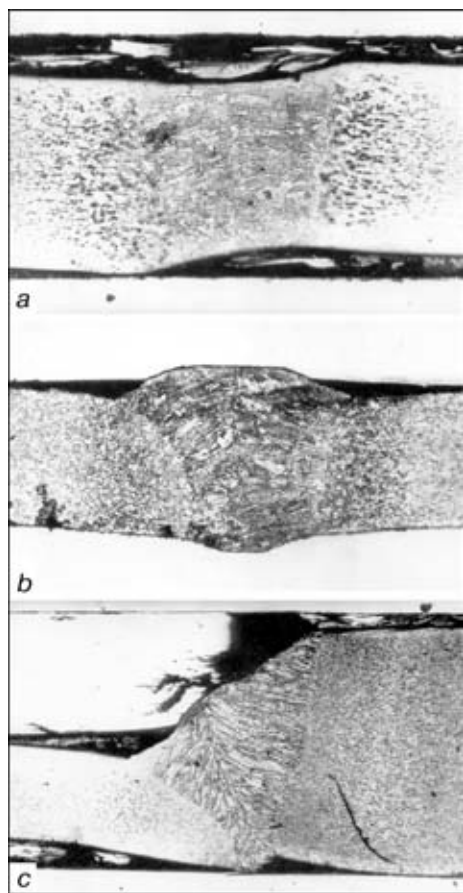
Microstructure of laser welded joints in low-carbon steels ($\times 63$): *a* — $v_w = 540$ m/h, $\delta = 0.8$ mm; *b* — using filler wire Sv-08G2S ($v_w = 420$ m/h, $\delta = 0.8$ mm); *c* — butt welding of sheets of a different thickness using filler wire ($v_w = 240$ m/h, $\delta = 0.8$ and 2.0 mm) ($\times 32$)
